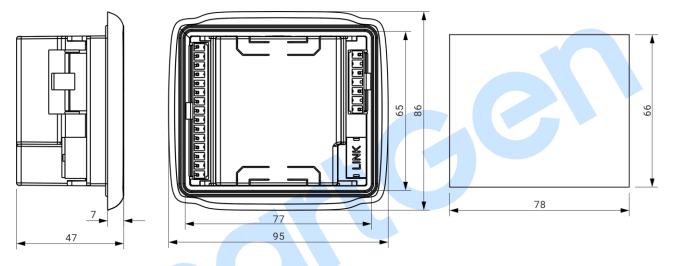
Overall and Cutout Dimensions (Unit: mm)
